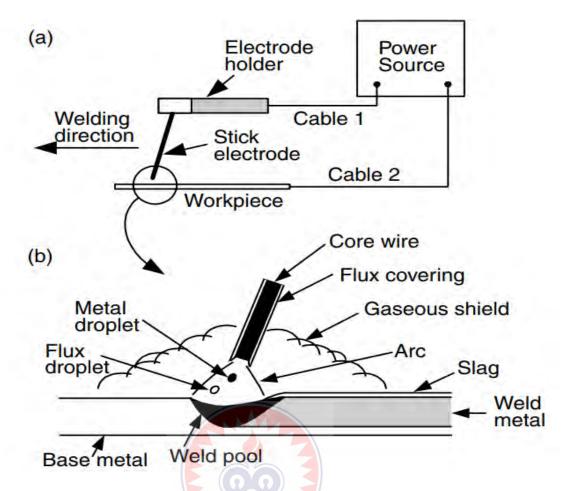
Shielded metal arc welding: (a) overall process; (b) welding area enlarged (Gourd, 2014)
